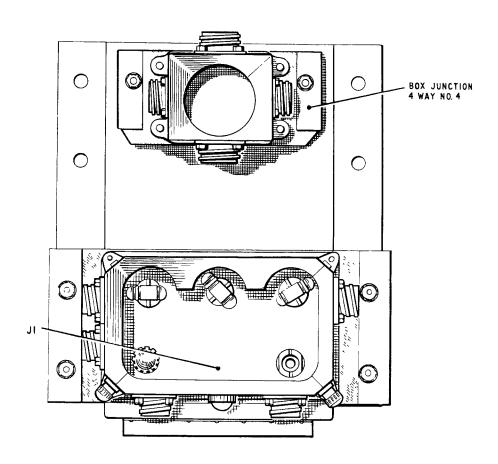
MOUNT ASSEMBLY WITH JI AND LT BOX FITTED
